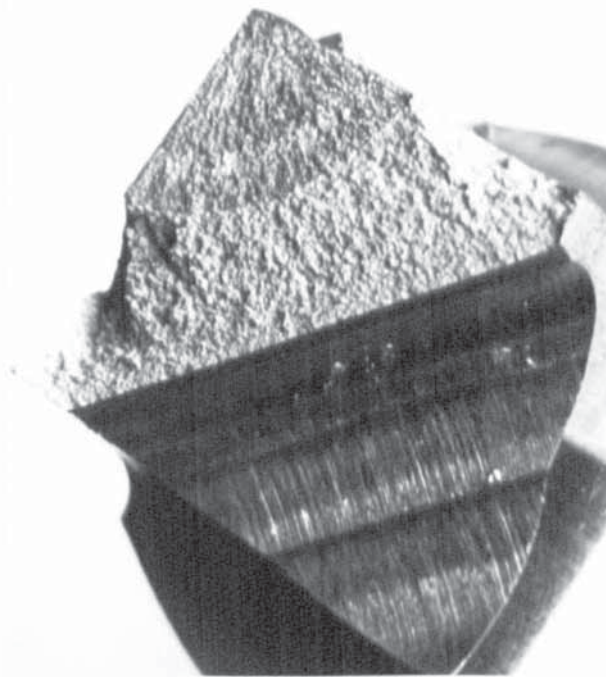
Corner Fatigue Fracture with Crack
